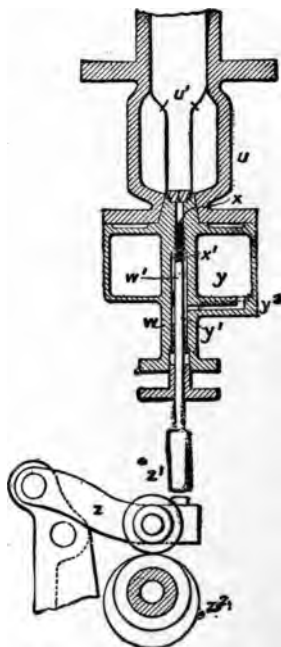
Britannia Company's (Gibbon's Patent) Petroleum Carriage Motor (Enlarged Section through Oil-Feeding Device).
